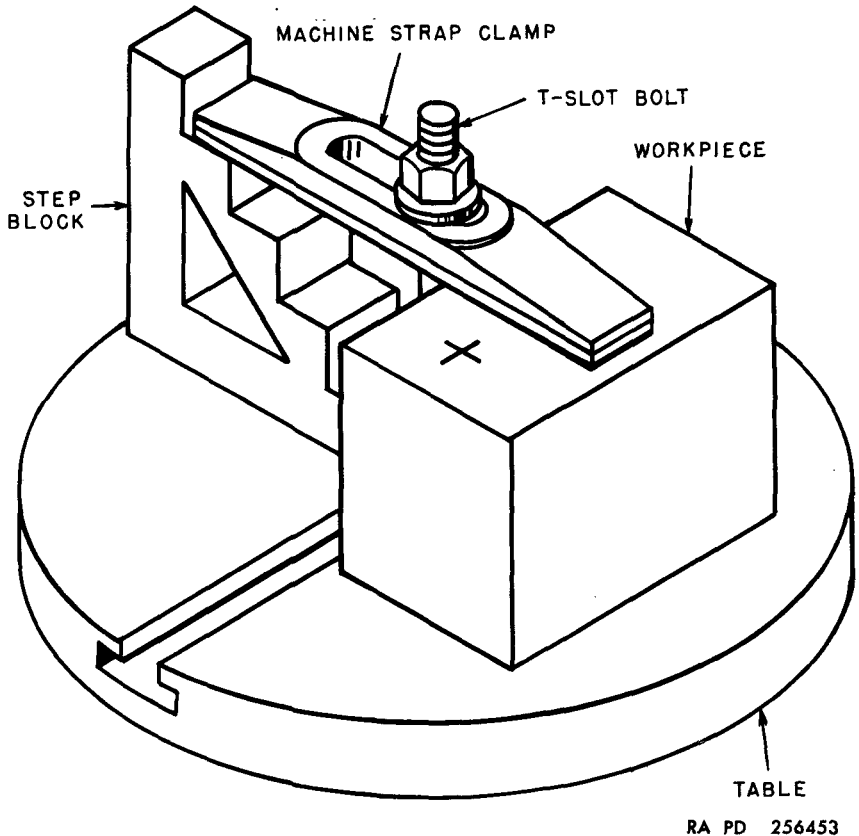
Mounting work using step block, machine strap clamp, and T-slot bolt.
